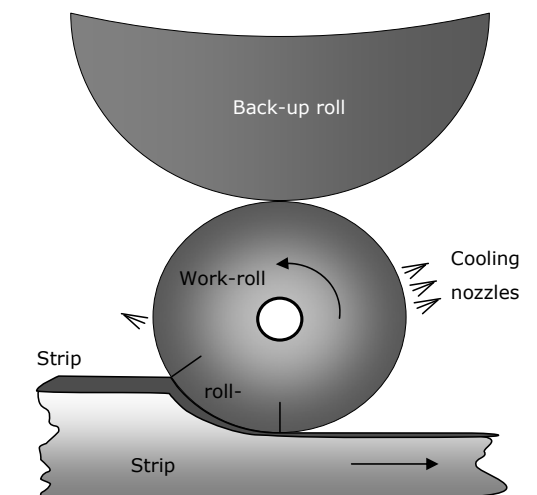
Schematic of the load contact and cooling systems for a roll in the finishing-mill in Port-Kembla Steelworks.
